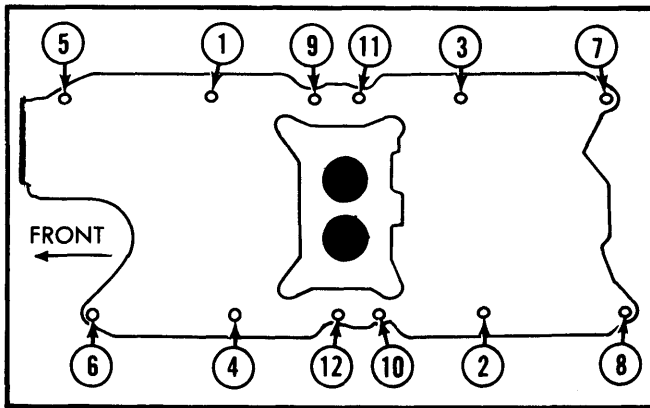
302" & 351" W Intake Manifold Tightening Sequence
